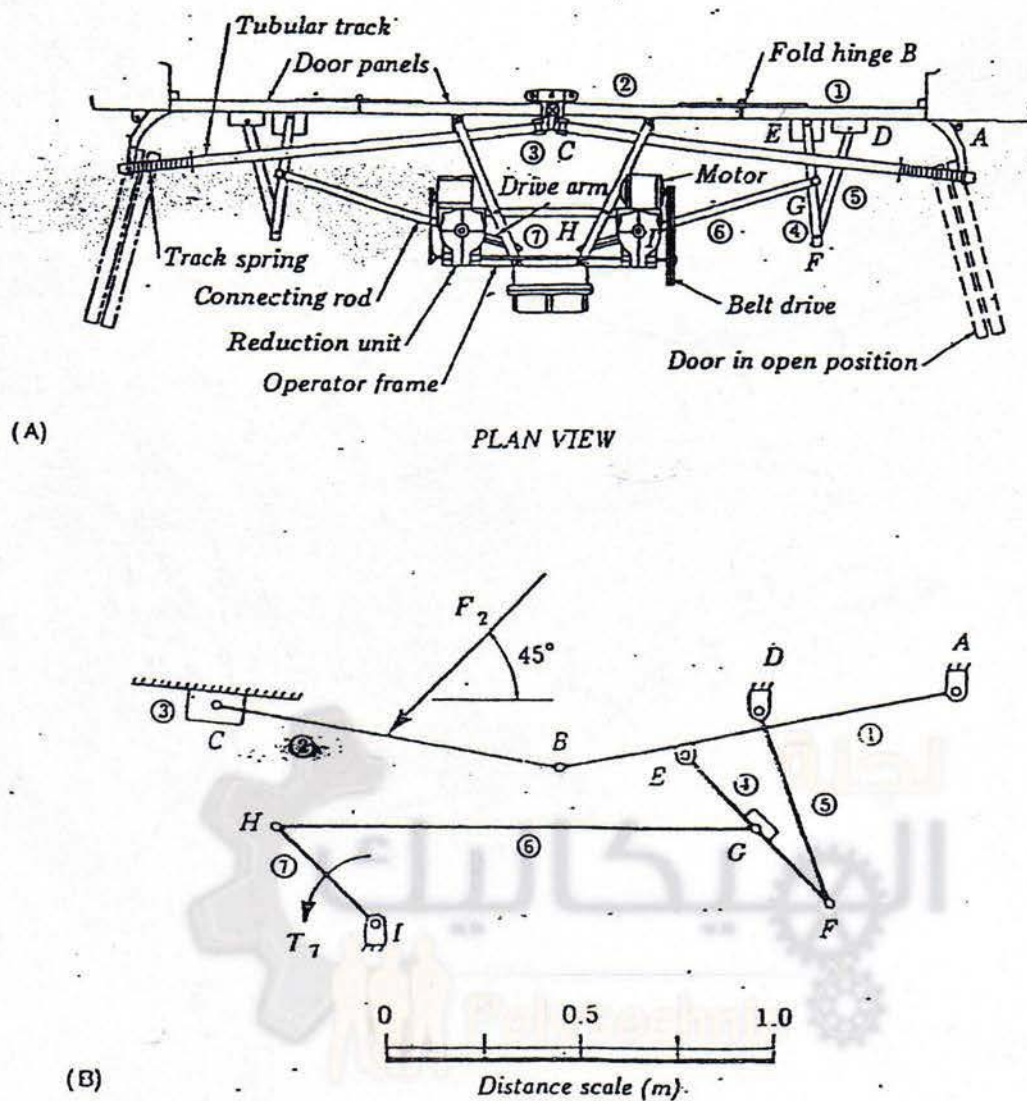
(A) An industrial door mechanism. (SOURCE: Electric Power Door Company.)
